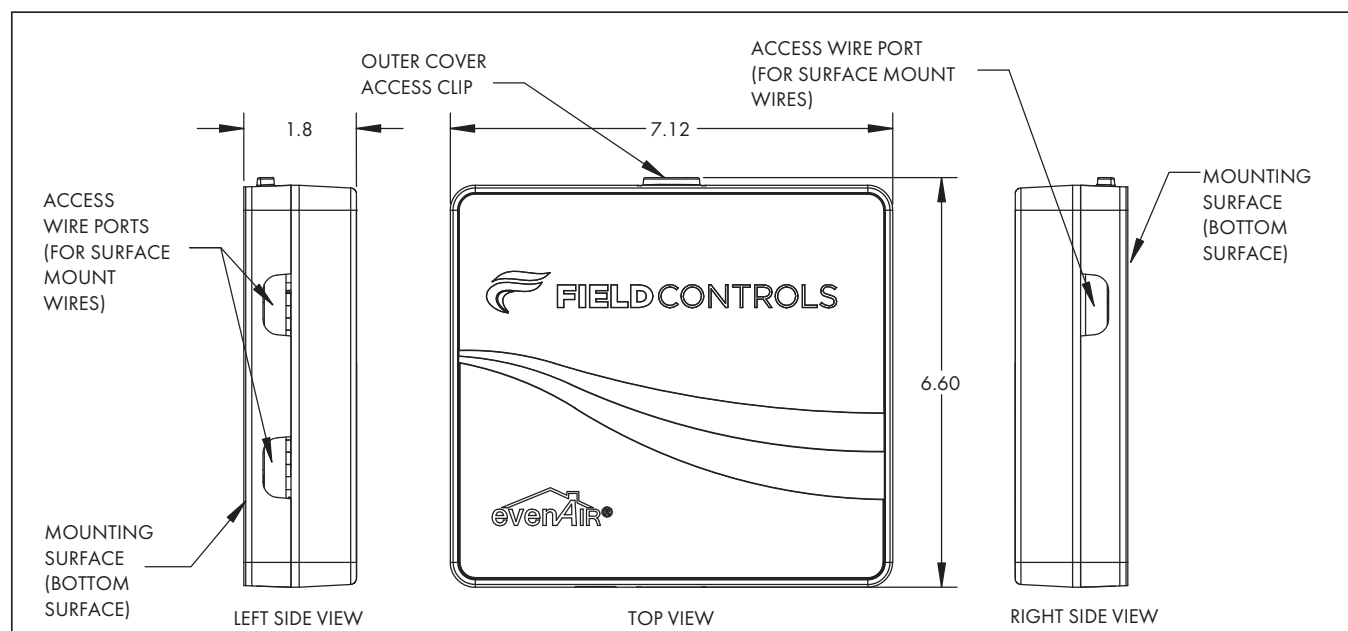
EvenAir 2.0 Enclosure Overall Dimensions
